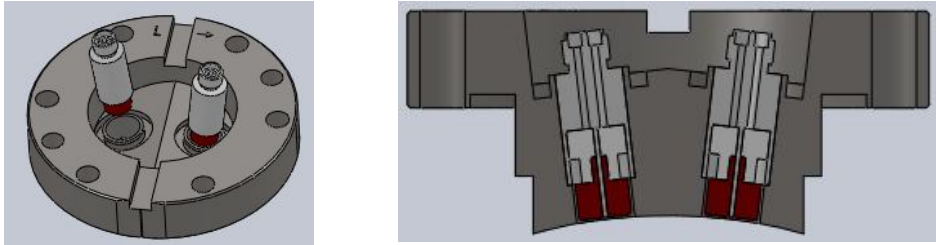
A protrusion is left for satisfactory quality of laser beam welding
